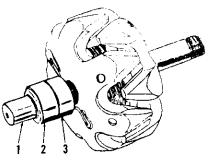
Removed rotor assembly showing test points when checking for grounds, shorts and opens.
